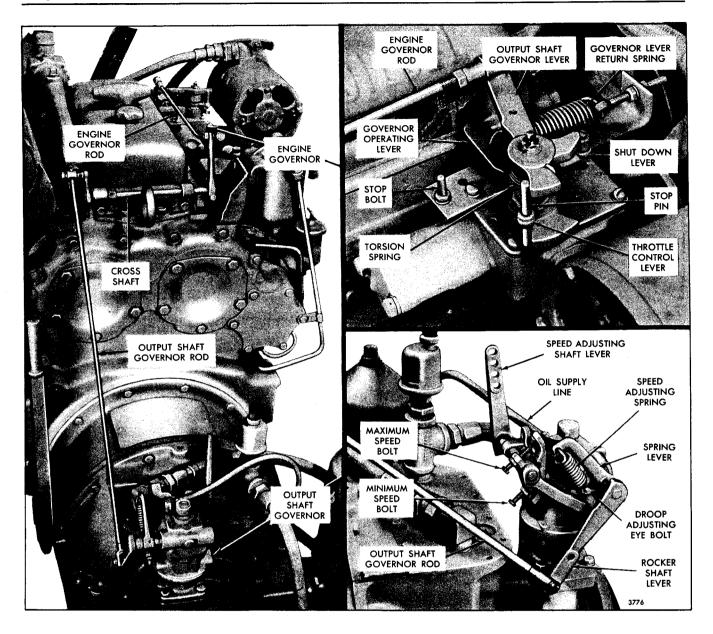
Gear Driven Output Shaft Governor and Linkage
